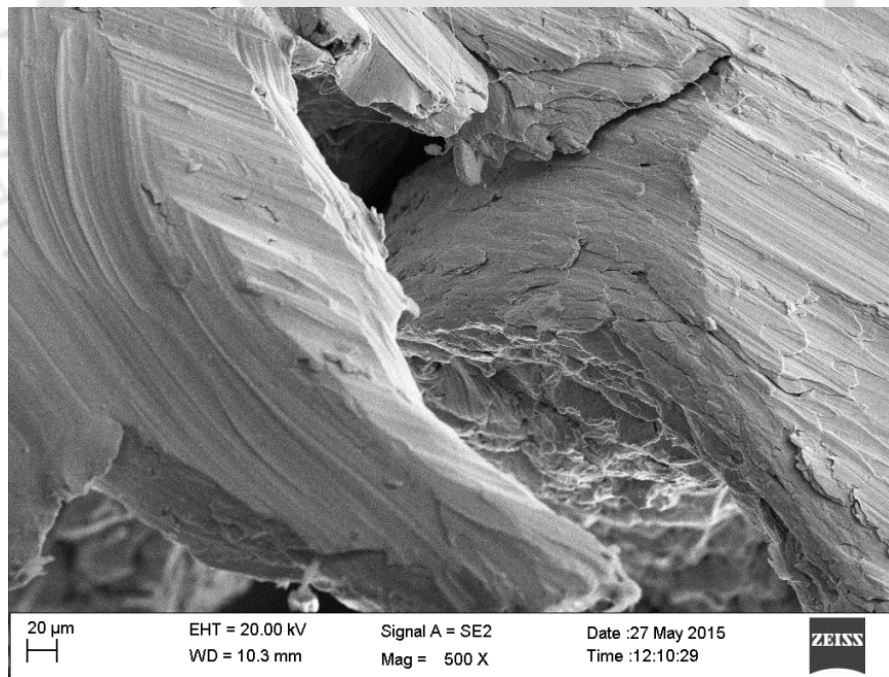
(a) Serrated edge of the chip produced by straight WC-Co cutting tool
